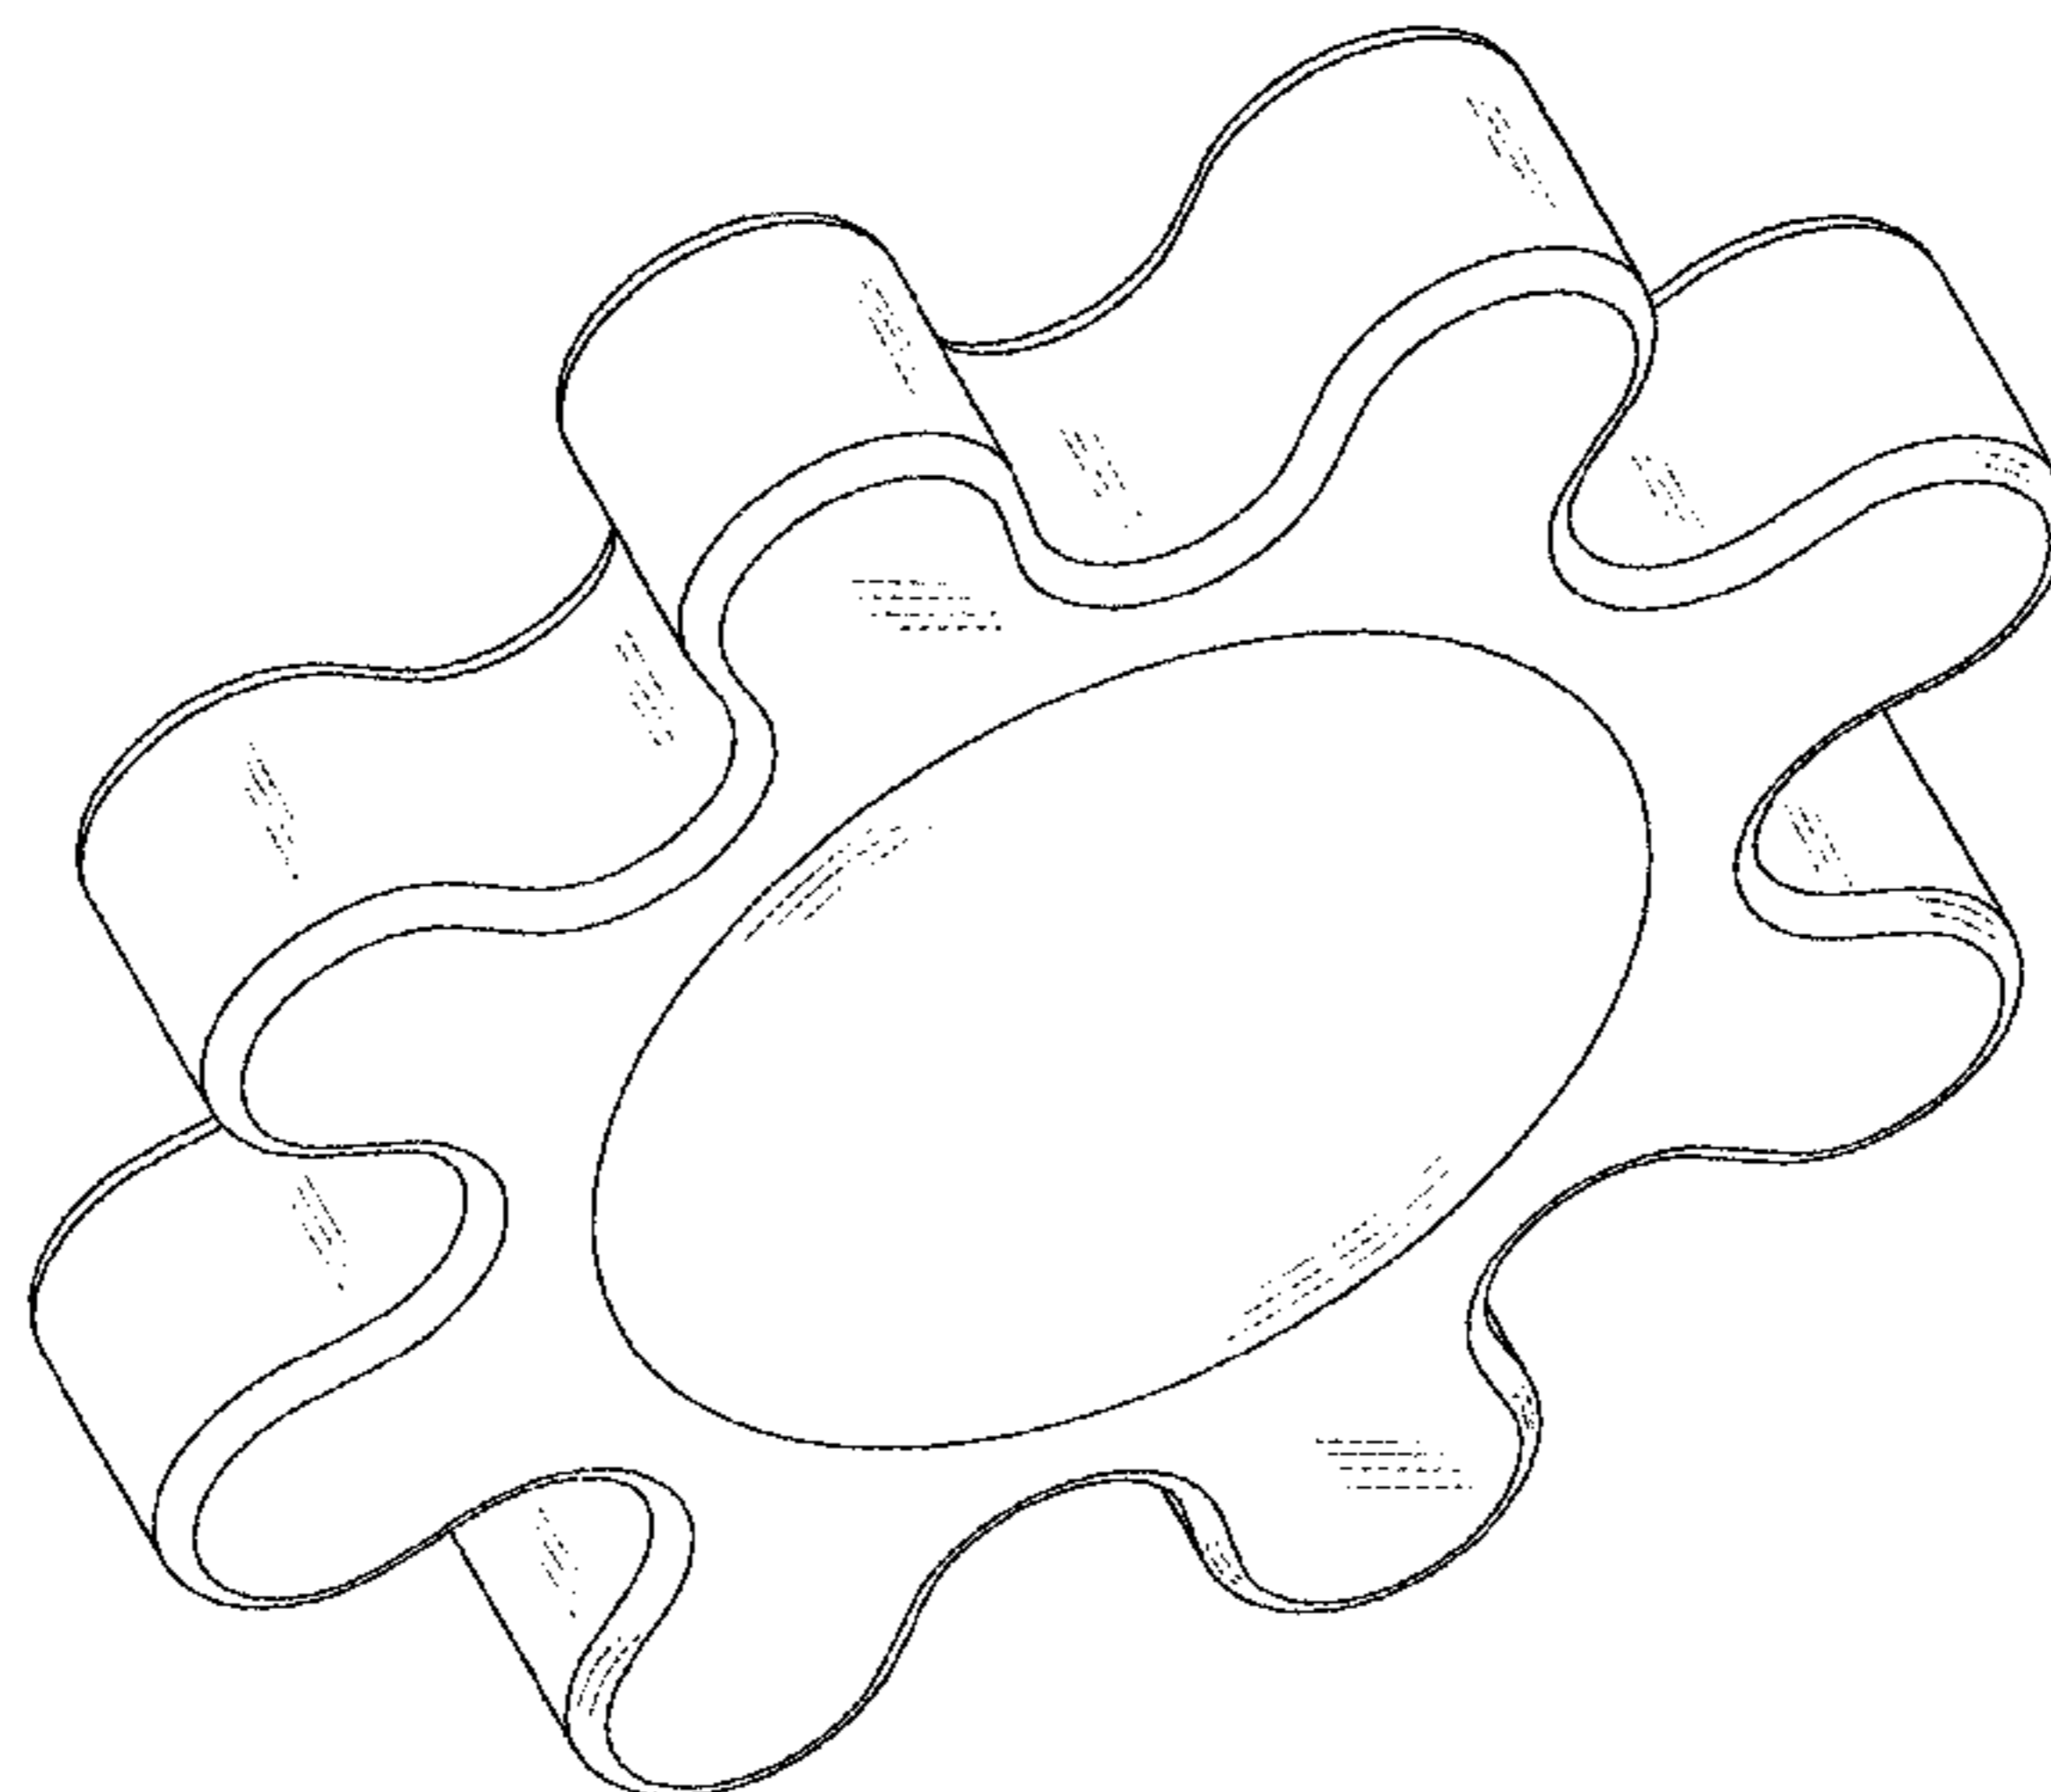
is a front elevational view of a separator for a ball bearing showing our new design, the rear elevational view being a mirror image of that shown; FIG. 2 is a left side elevational view thereof, the right side view being a mirror image of that shown; FIG. 3 is a top plan view thereof, the bottom plan view being a mirror image of that shown; FIG. 4 is a longitudinal sectional view taken along line IV-IV in FIG. 1; and, FIG. 5 is a perspective view thereof.
